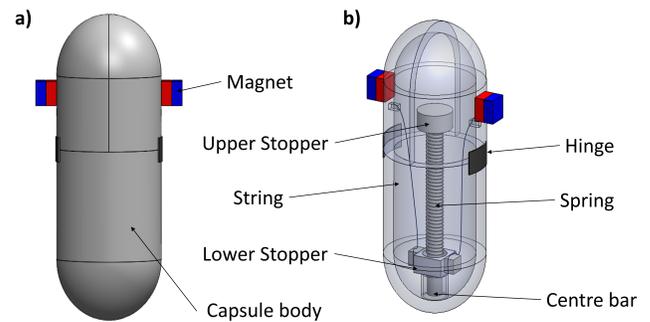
Schematic of the capsule showing a) front view b) internal view showing the mechanism.
